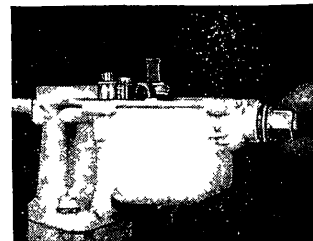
Install needle seat and gasket, then install needle. If needle or seat shows wear, replace both
